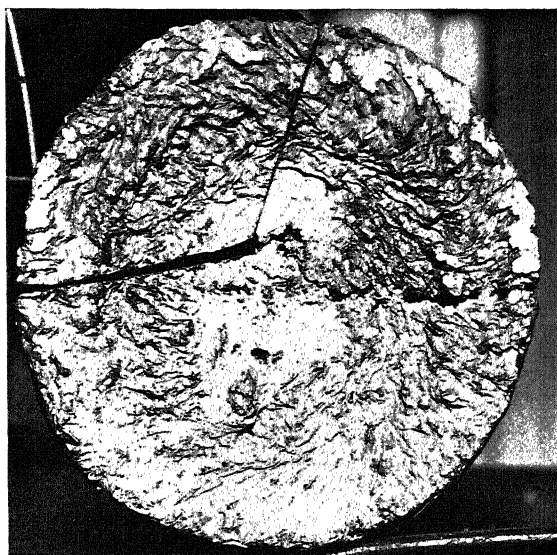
UPPER SURFACE OF ROTATED INGOT, SHOWING STRONG SPIRAL MARKINGS.
